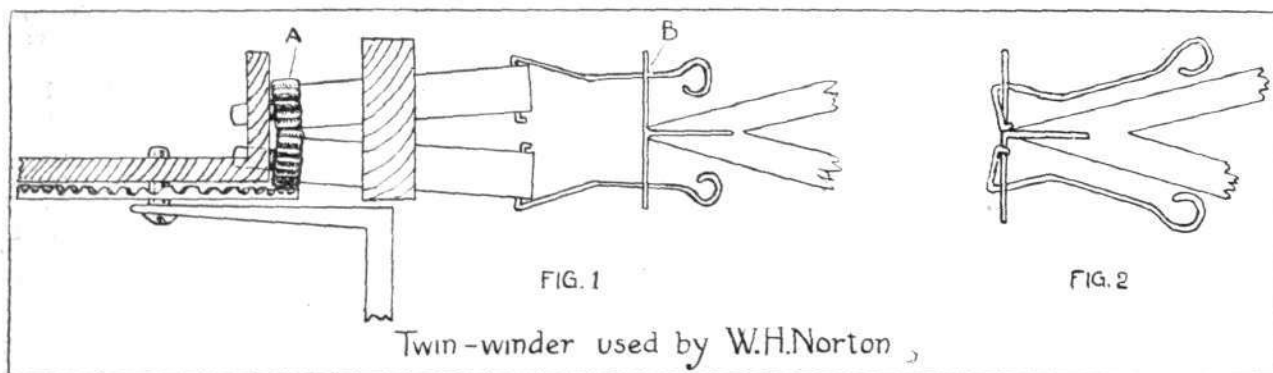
is a top view of the winder showing method of attachment of rubber hooks, also position of hooks when winding. Fig. 2 shows position of hooks with elastic wound, locked over bearing by torque of elastic. A shows two pinion wheels taken from eggbeater, worked by right-angle cog from same. B shows the brass bearings on the nose of the model turned at right angles and inserted between the longitudinals.
